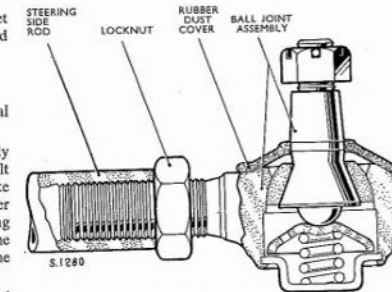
Sectional view of the steering side rod ball joint assembly
